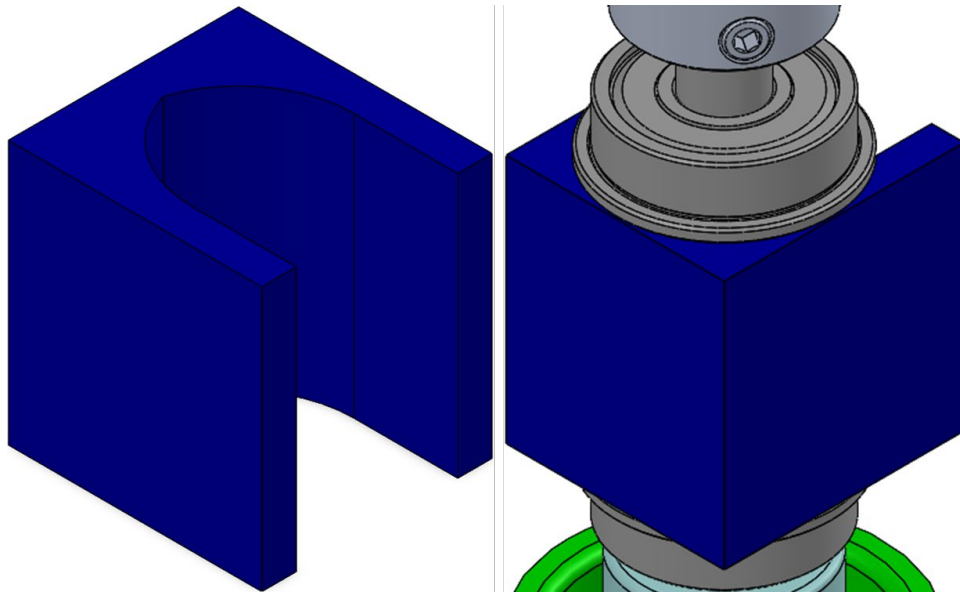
CAD of an assembly aid used to hold the bearings in place while inserting a shaft into the version 2 design.
